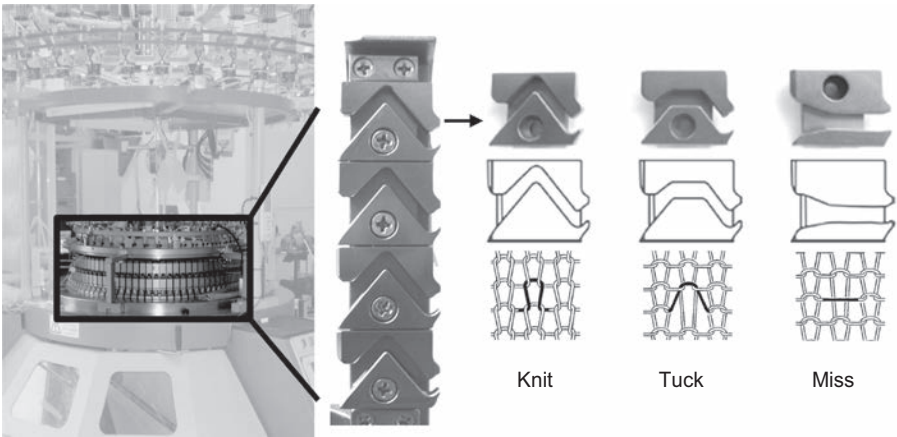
Cams and pattern element of single jersey large circular knitting machine.
